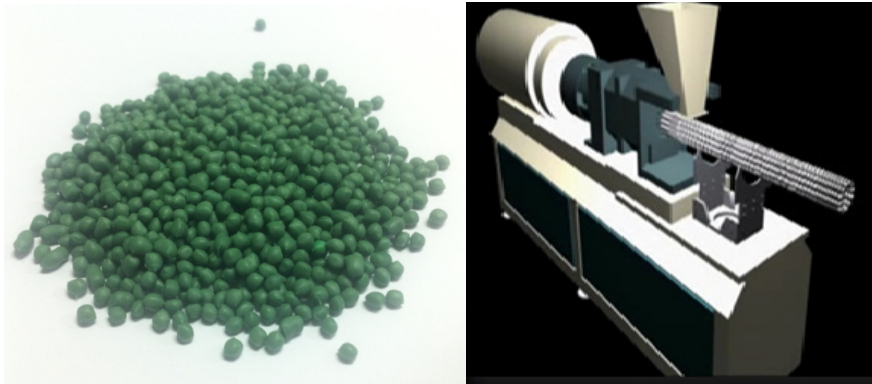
Synthetic turf filler(or pellets) extruded from the 12-axis extruder.
